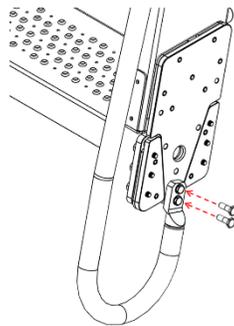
Install AN4-10A bolts through Extension tang and into nutplate.
